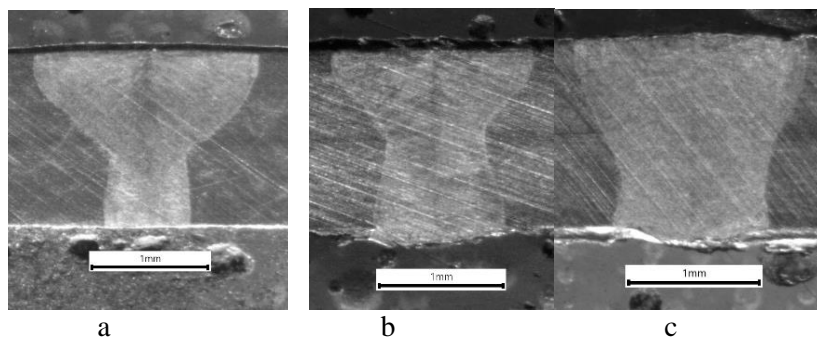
Cross sections of welds made at optimal welding parameters: (a) $P=1.5$ kW; $V=1.5$ m/min; $\Delta F=0$ mm; (b) $P=2.5$ kW; $V=2.5$ m/min; $\Delta F=0$ mm; (c) $P=3.5$ kW; $V=3.5$ m/min; $\Delta F=0$ mm
